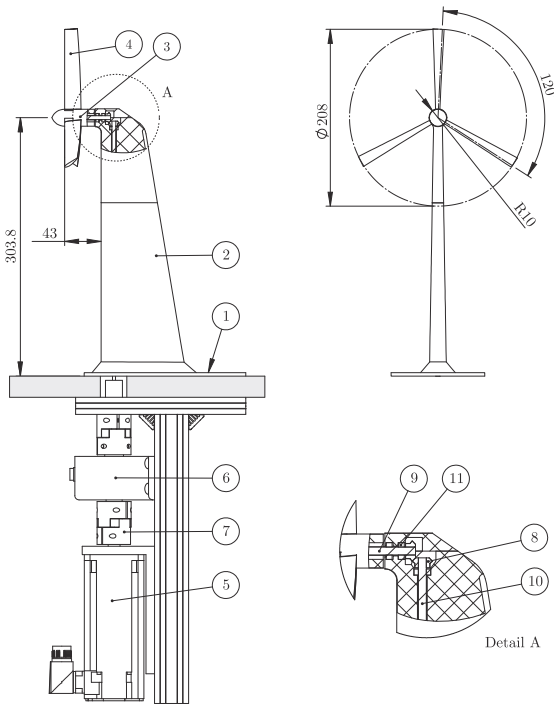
Model wind turbine design, with side-view on left, front view on the upper-right corner, and a breakout section detailing the bevel gearbox at the bottom right. (1) base plate; (2) tower; (3) hub; (4) blades; (5) motor; (6) torque encoder; (7) coupling; (8) right-angle bevel gearbox; (9) turbine shaft; (10) vertical driveshaft; (11) ball-bearing. Dimensions are in millimetres.
